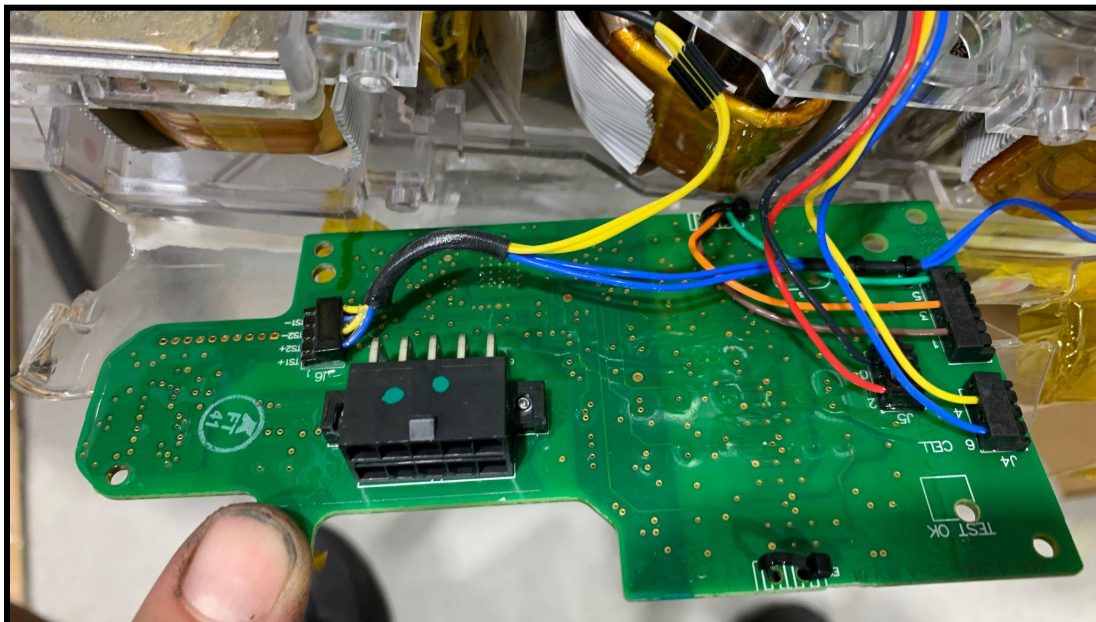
Rev. A - The balance wires are soldered to the old board.
